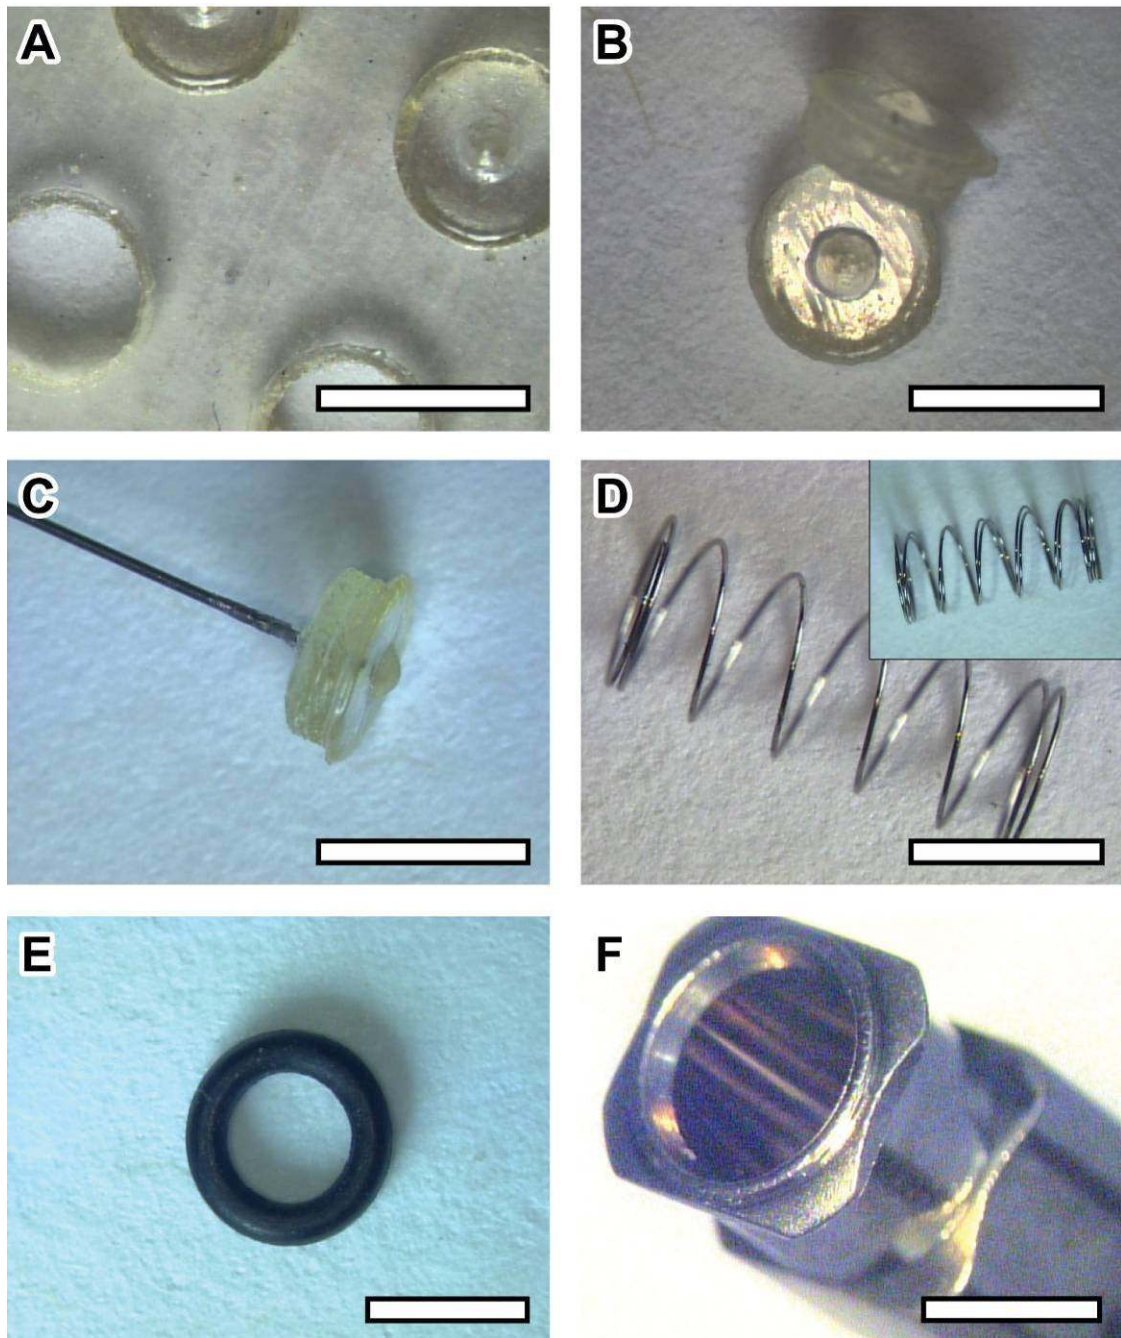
Bright-field photographs of the various components used in the spring-loaded packaging design: (A) Stereolithographically printed buttons in the supportive sheet prior to separation, (B) completed and cleaned buttons, (C) the assembled button and drive cable, (D) the compression spring, (E) the rubber o-ring, and (F) the luer hub of the stainless steel luer needle. Two to three springs could be successfully nested (D, inset, two springs) to increase the loading on the button without any inter-spring stiction-based interference. All scale bars are 3.5 mm.
